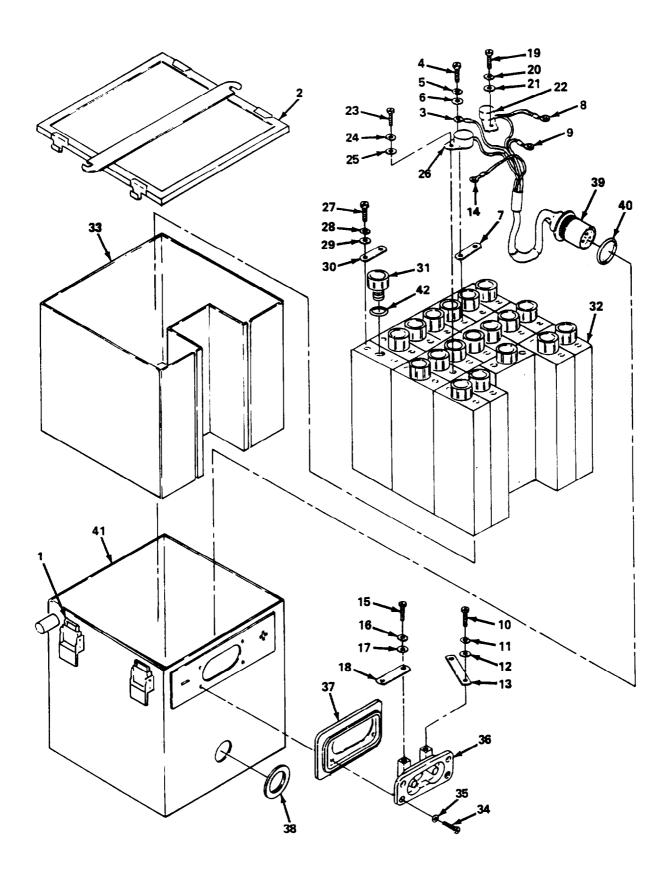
12. Battery BB-432A/A or BB-432B/A Disassembly.
